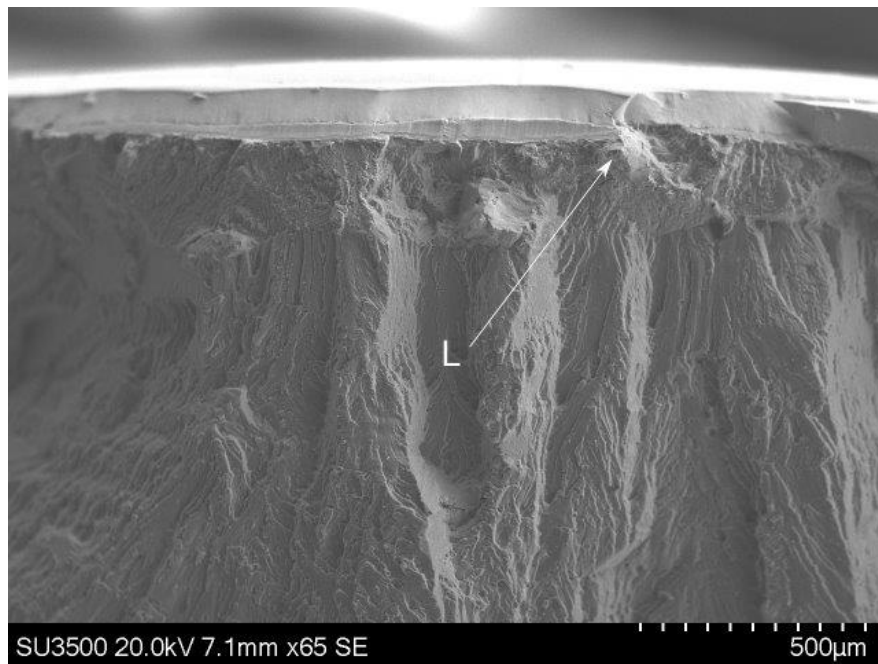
Location L on fracture surface of specimen H16.
